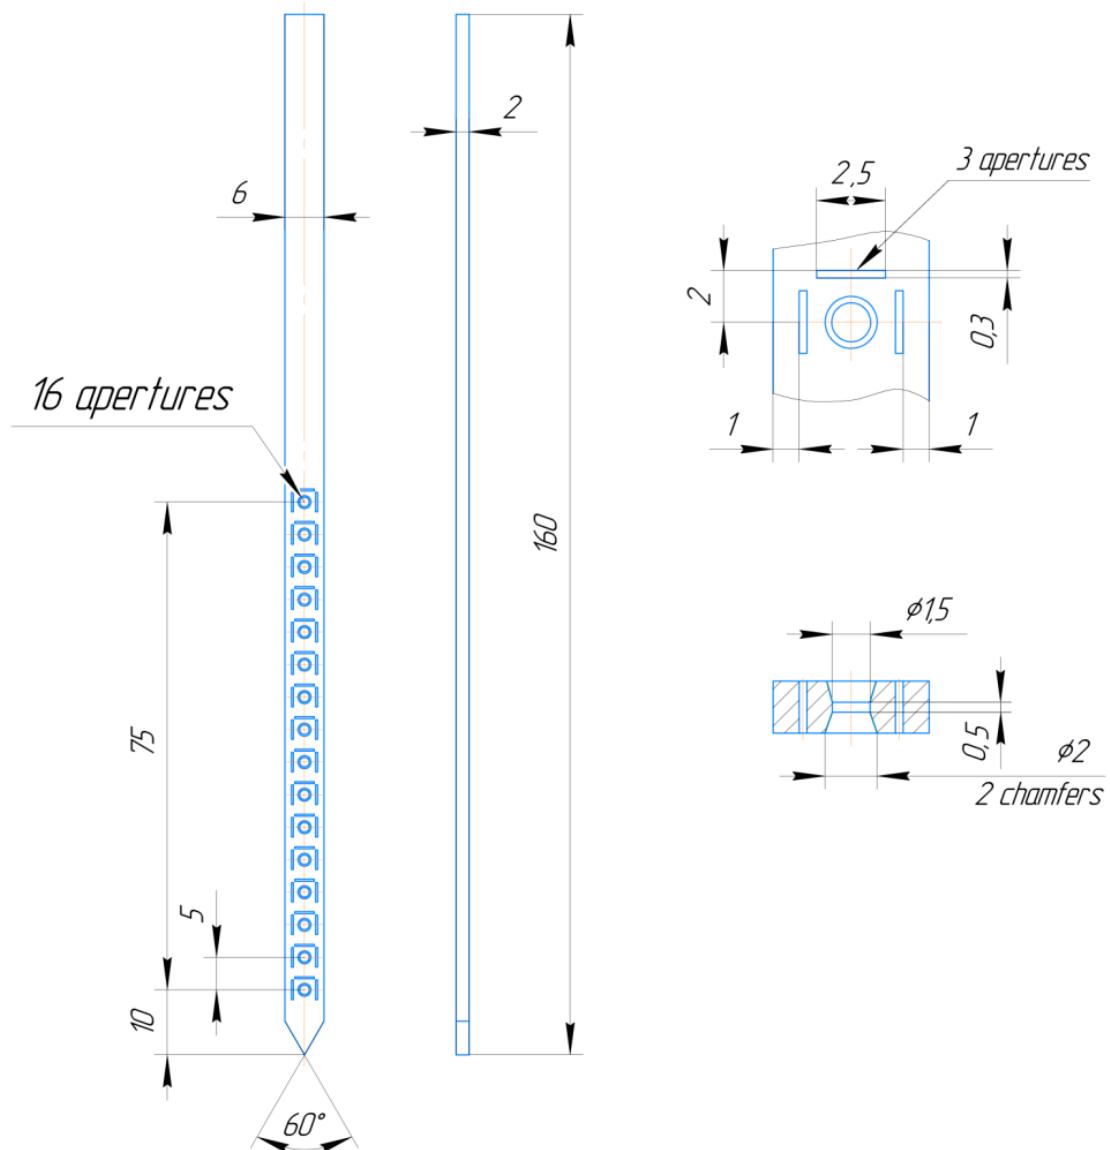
Schematic view of the strip for the differential BLT. Dimensions are in millimeters. The drawing is based on ISO 18311.
